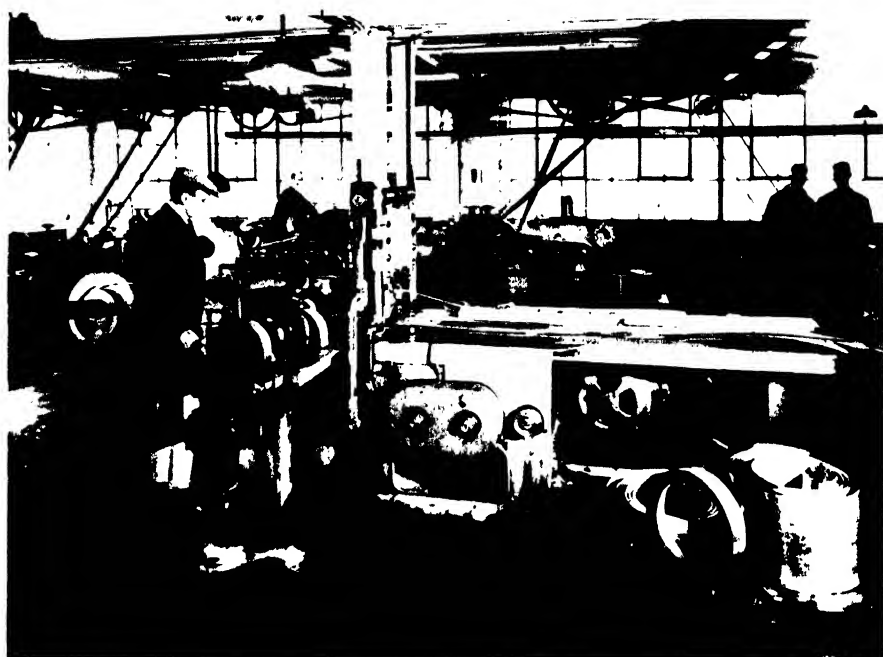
Continuous electric-annealing, pickling, scrubbing, drying and coiling plant for brass strip.
